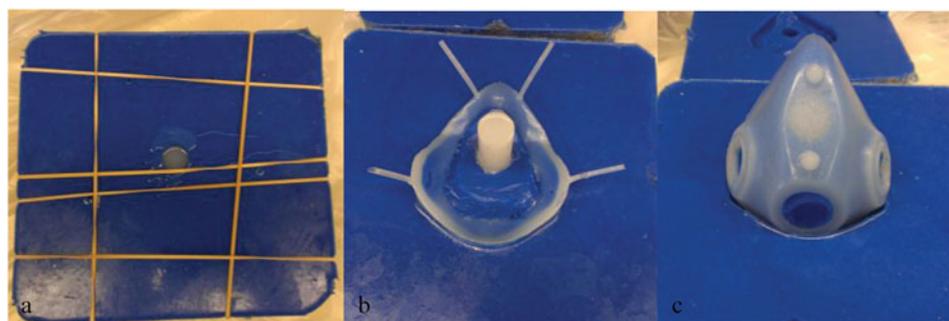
Casting prototype facepieces (a: mold system reassembled for casting; b: cast DragonSkin facepiece in mold; c: cast DragonSkin facepiece on male mold). (color figure available online).
